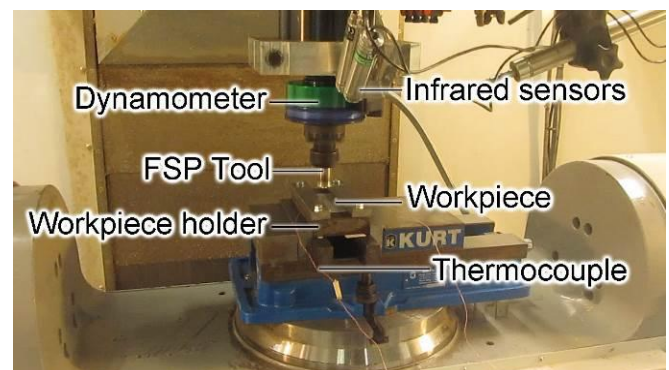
The FSP experimental setup mounted on the trunion of the HAAS-VF6 vertical machining center.
